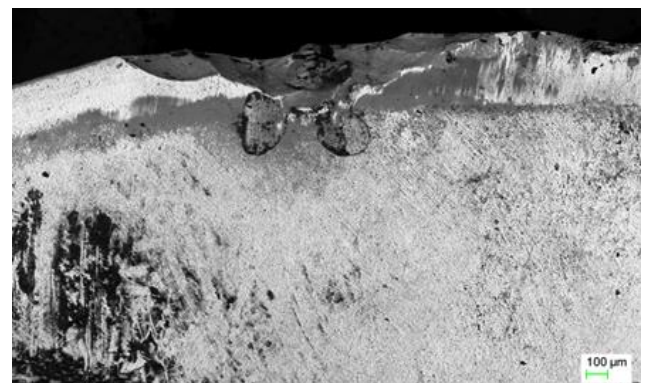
Failure mechanisms experienced by the coated ion implanted cutting tool inserts.
